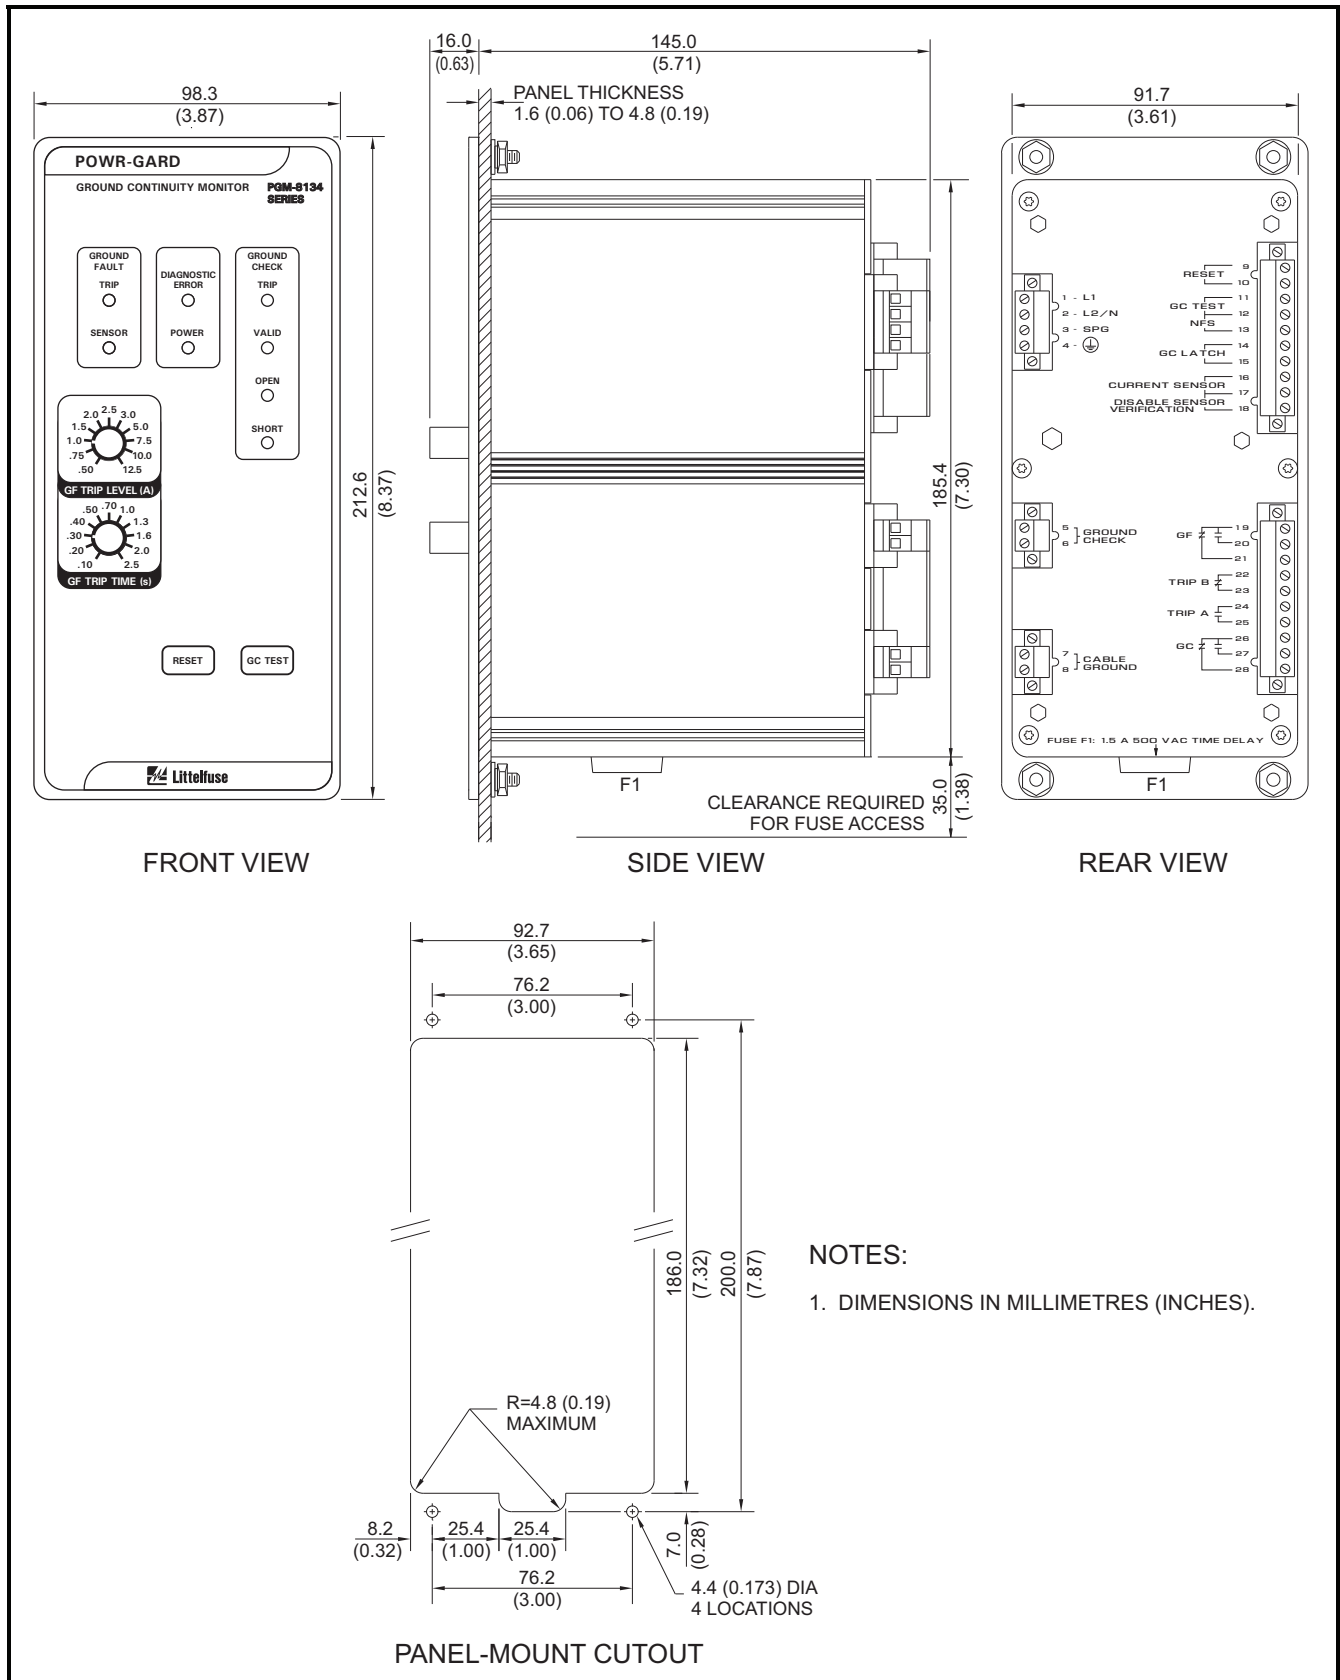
PGM-8134 Outline and Panel-Mounting Details.
